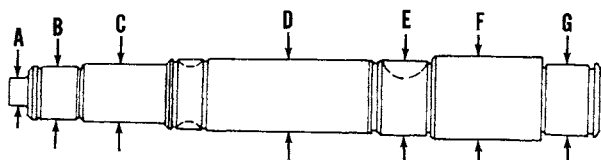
Measure transmission drive shaft diameters at locations indicated when checking for wear. Refer to text for specified dimensions.
